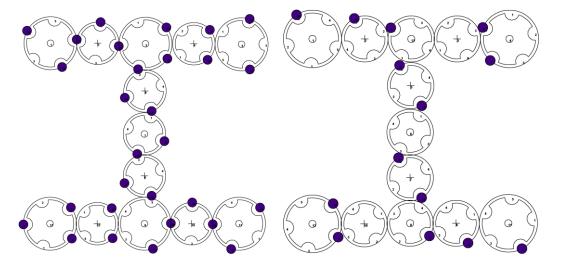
possible configuration a) with adjustment of horn gears b) with adjustment of carrier arrangement for production of double-T profile
